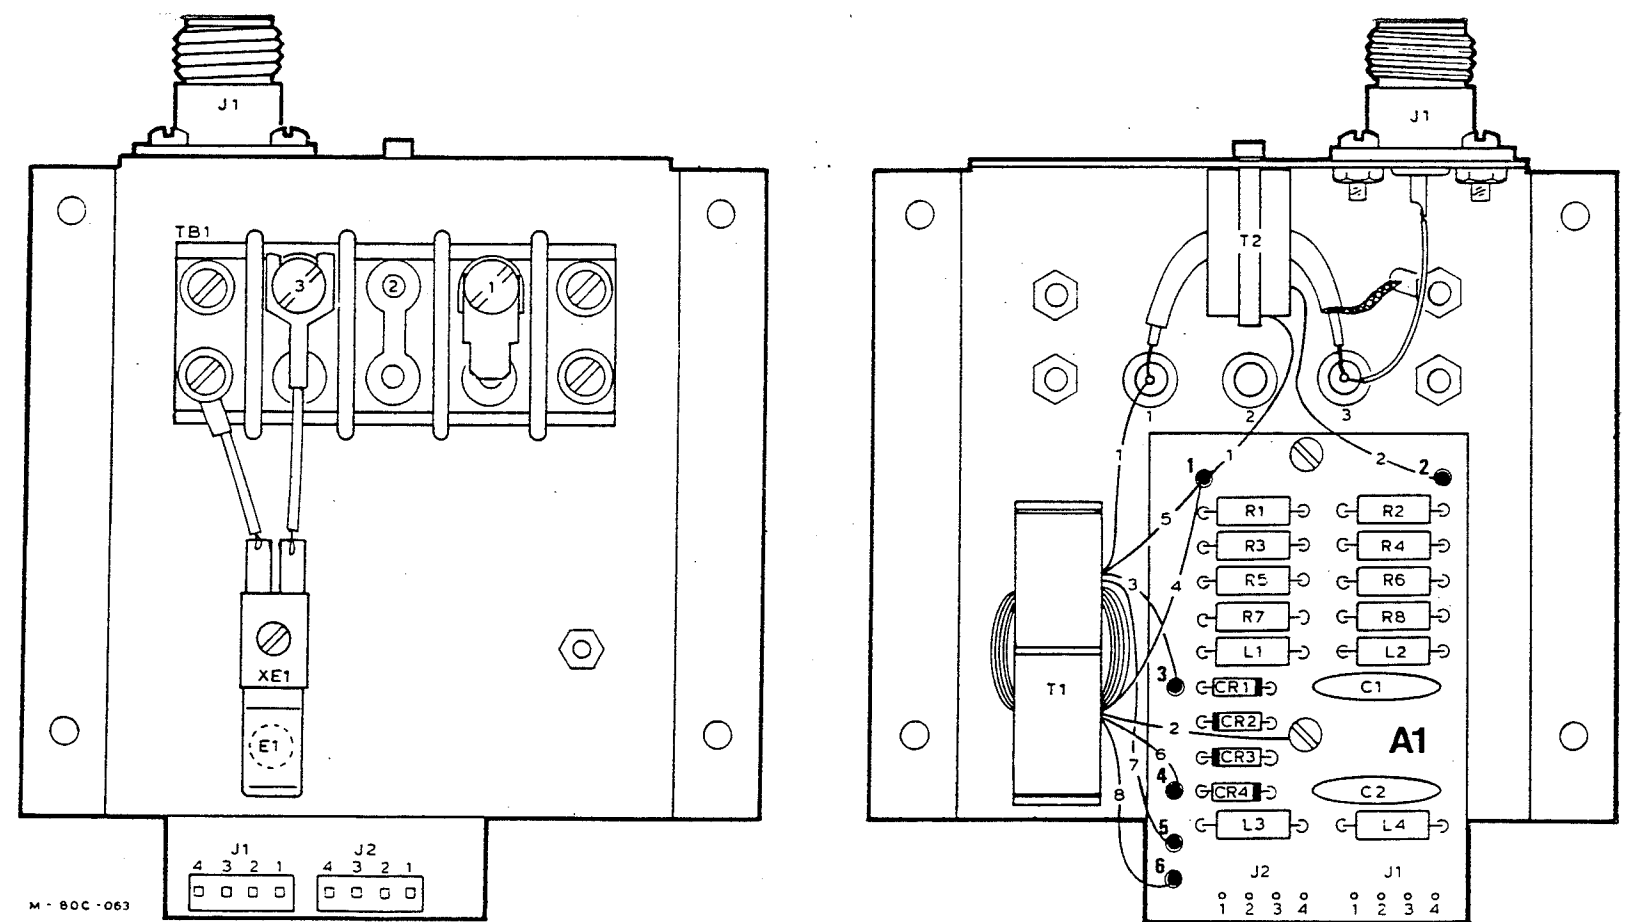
Assembly Detail - NAFPI1 RF Power Probe Assembly
